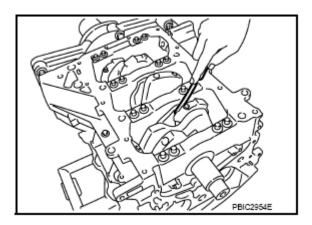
Measuring Side Clearance Between Connecting Rod And Crankshaft Arm Using Feeler Gauge
